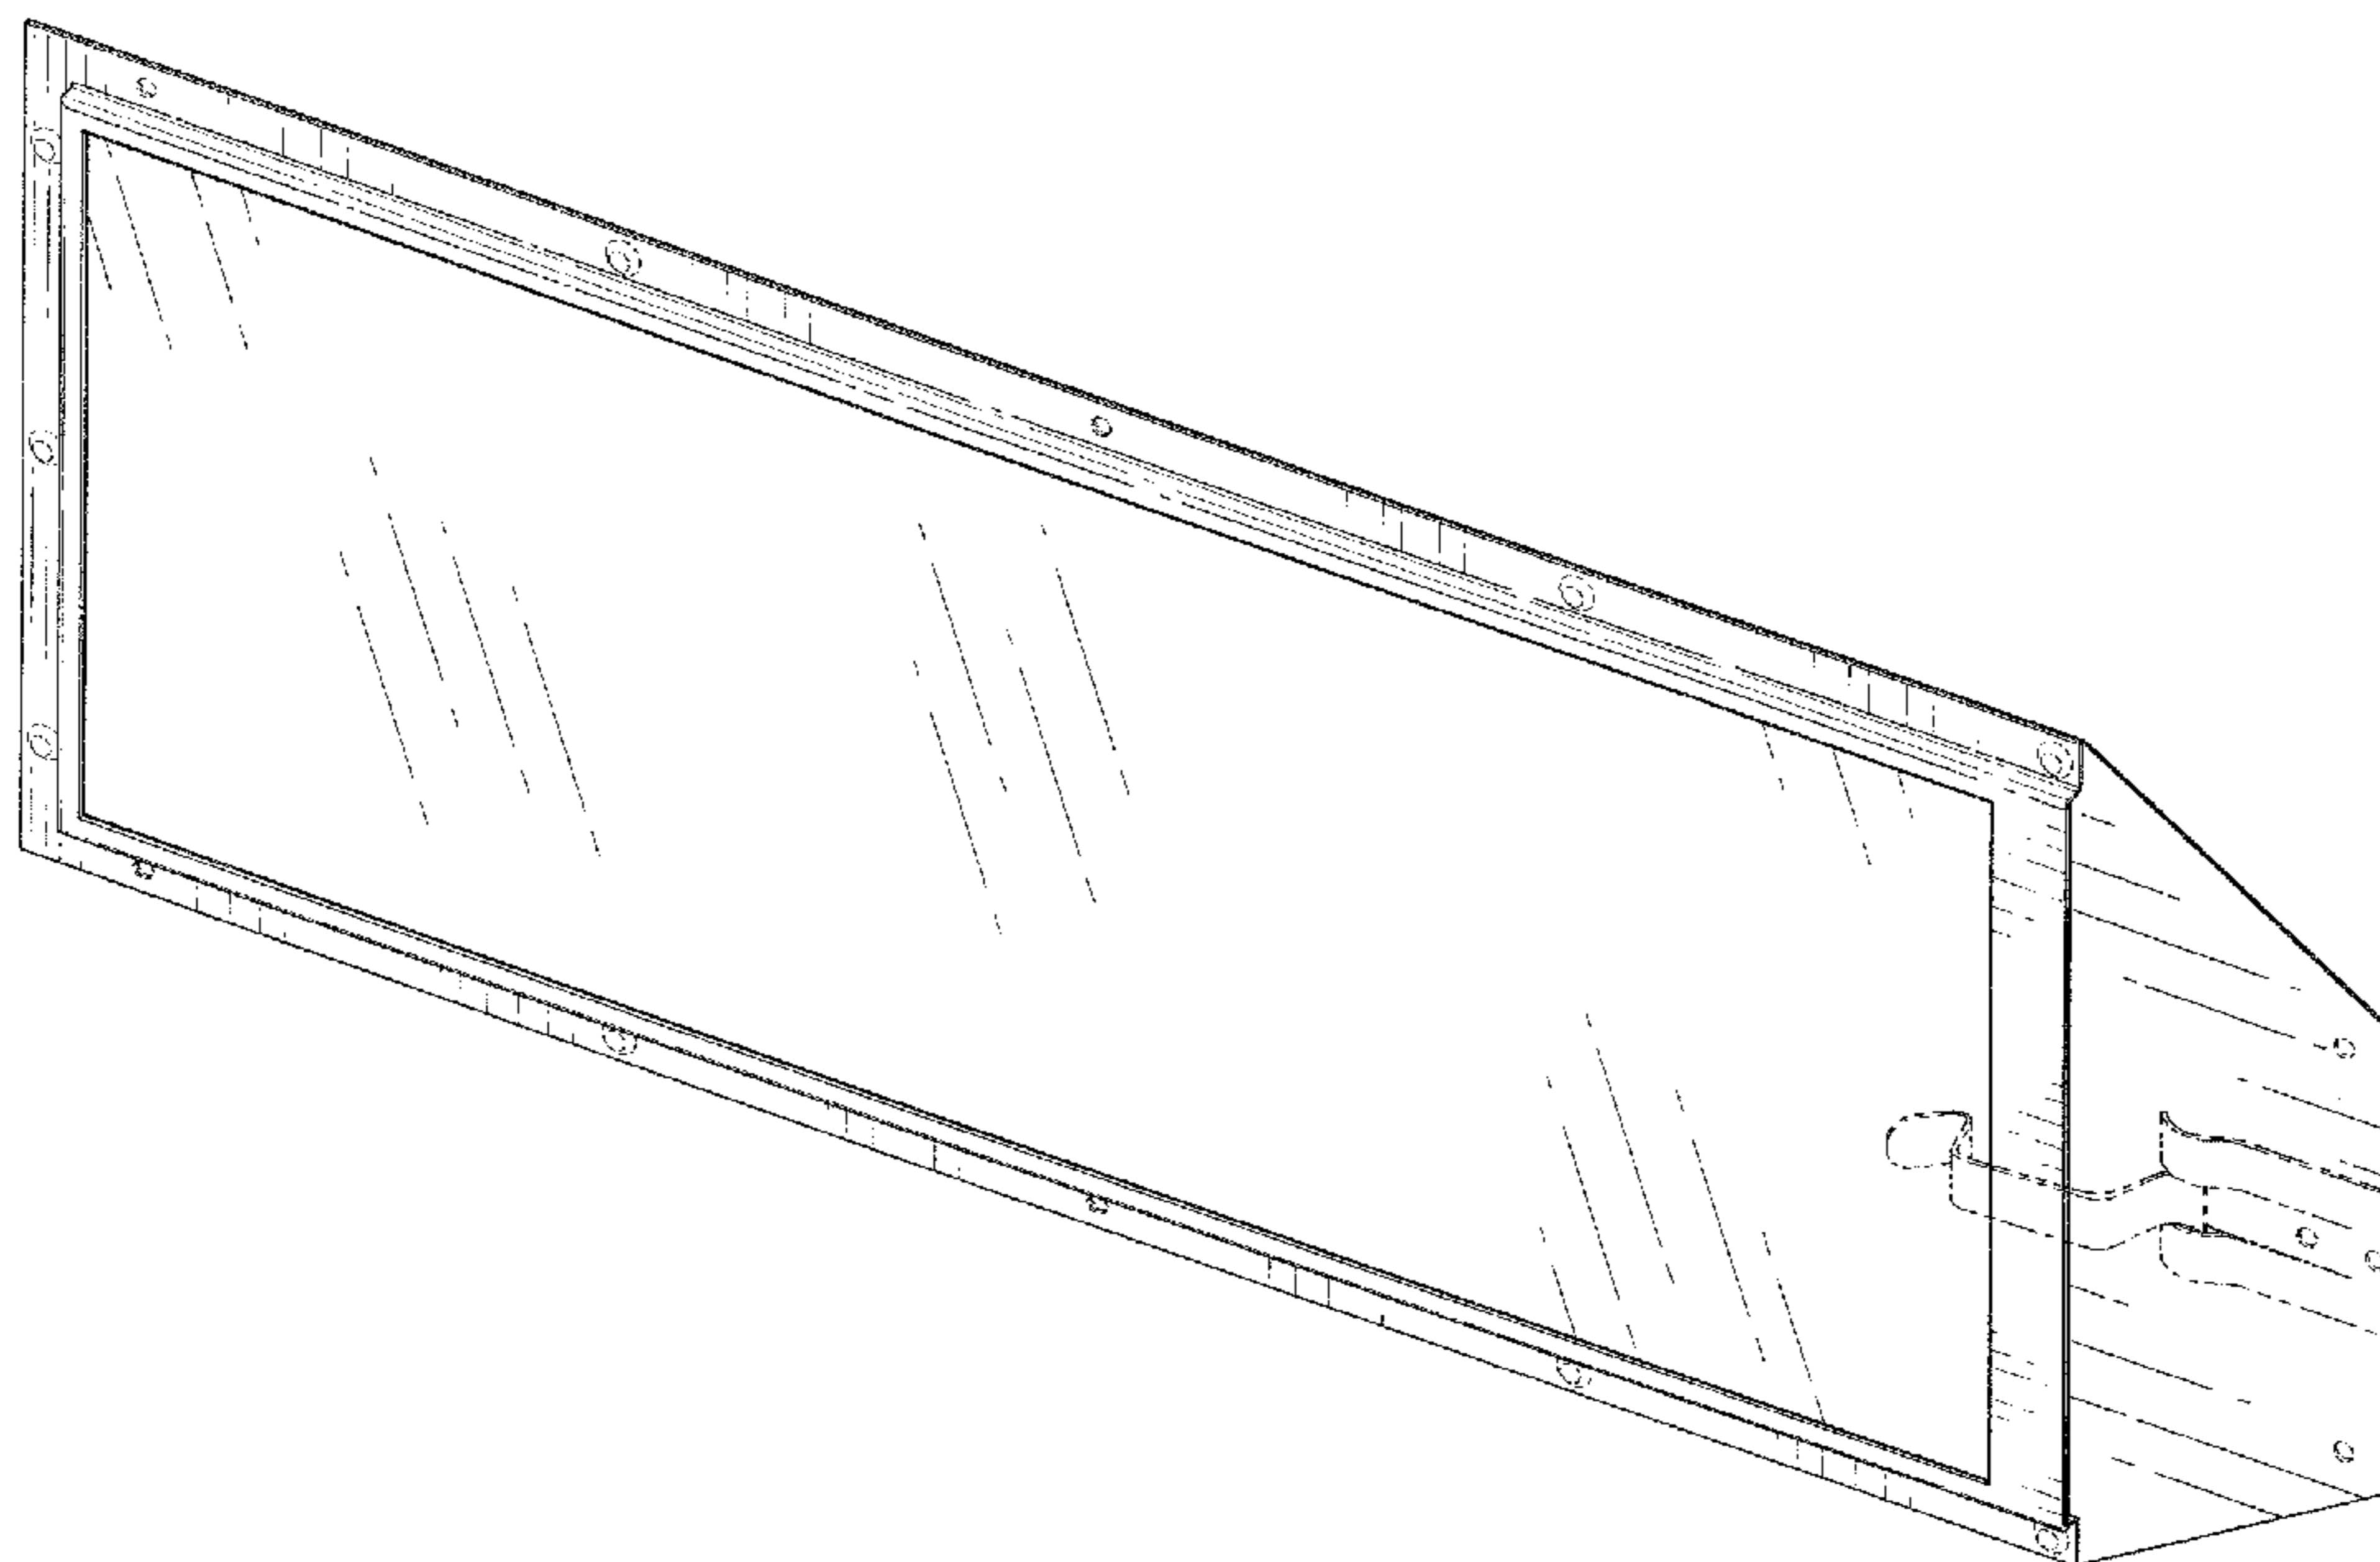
is an enlarged left side elevation view of the placard holder of FIG. 2.
